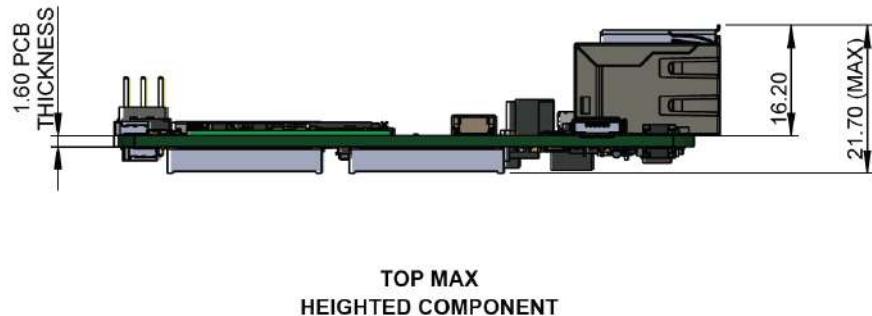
Mechanical Dimensions of STM32MP135 SBC Side View-2
